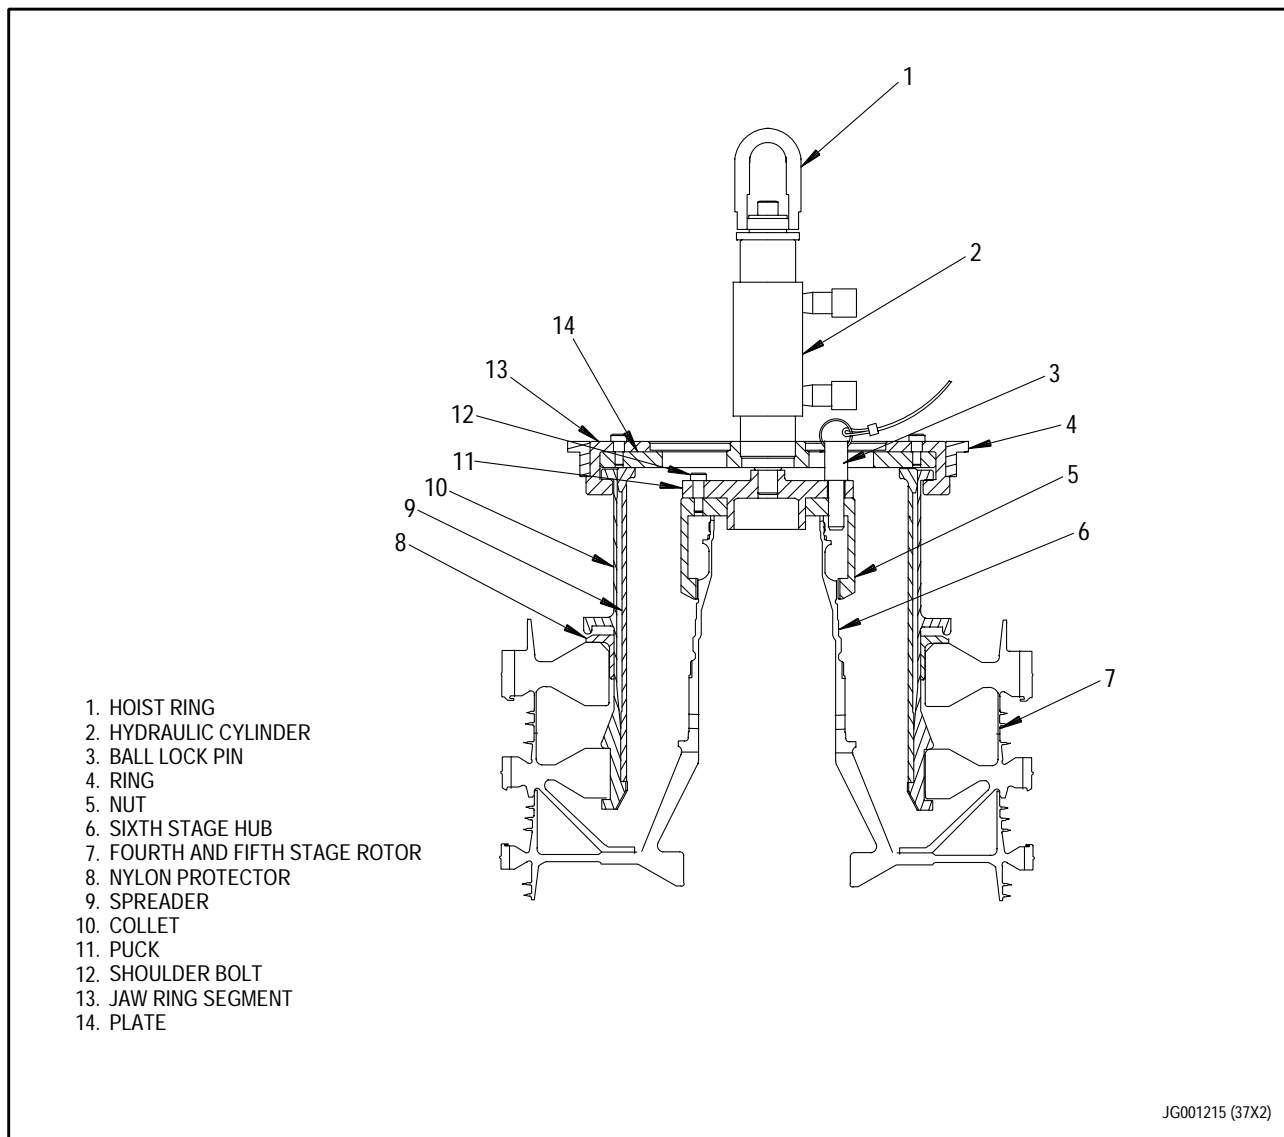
Installation of Fourth and Fifth Stage Rotor Using PWA 57604 Pusher/Puller
